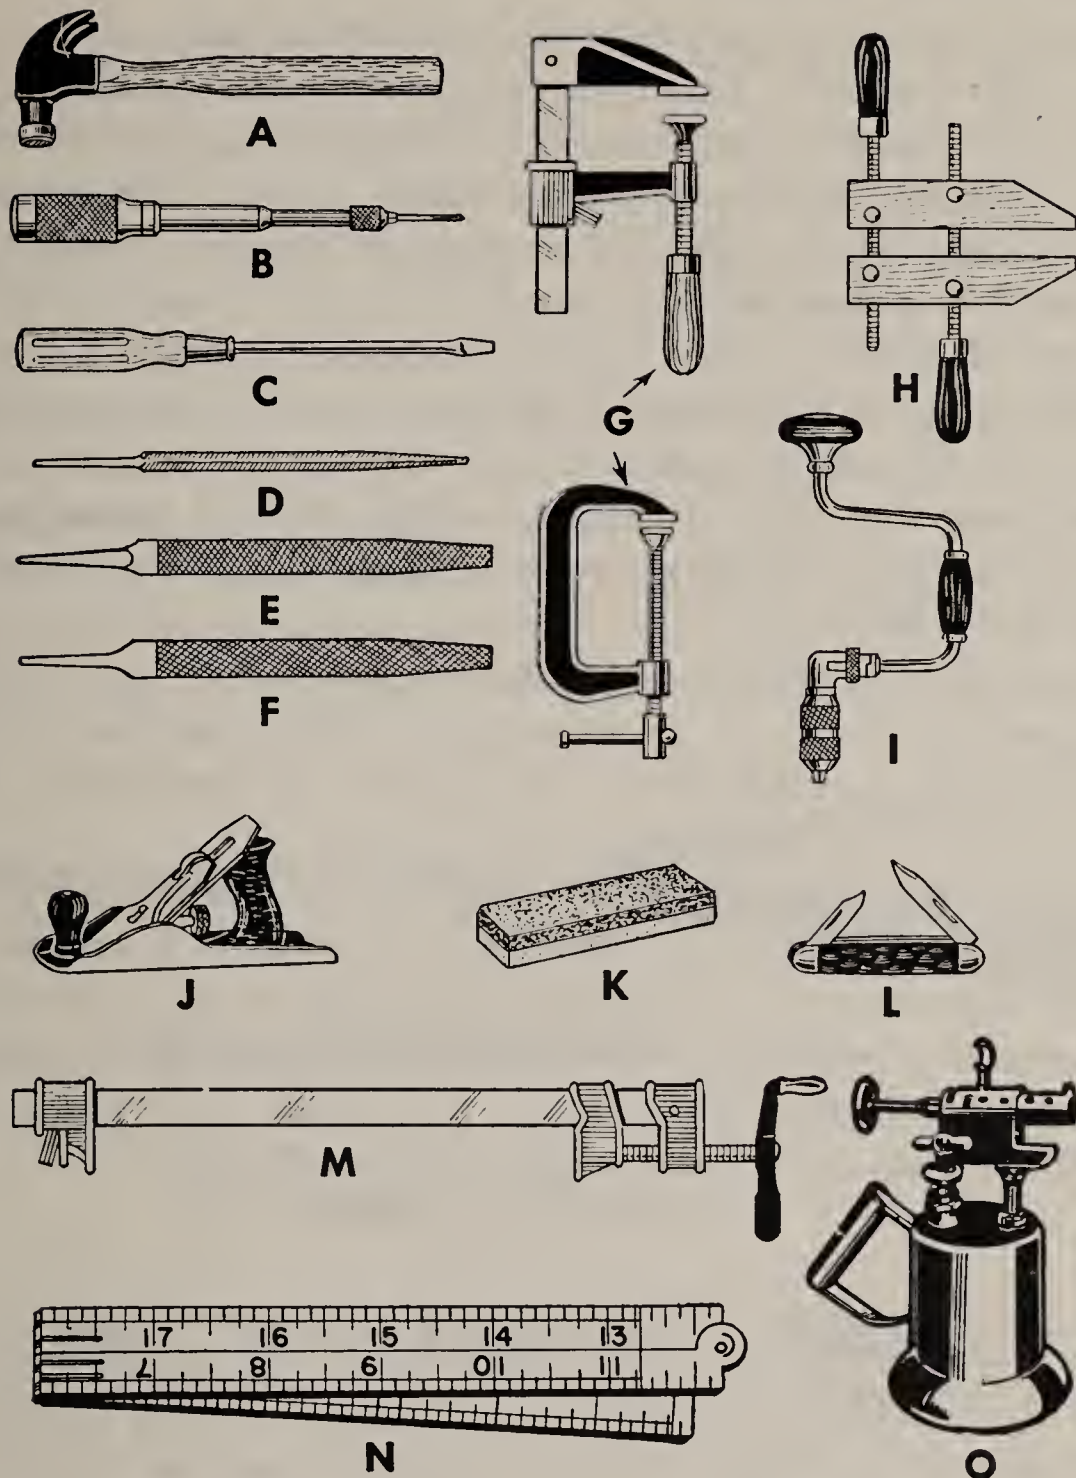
Hand tools continued. A, claw hammer; B, automatic push drill; C, screwdriver; D, slim-taper file; E, bastard file; F, rasp; G, clamps; H, hand screw; I, bit brace; J, jack plane; K, combination oilstone; L, pocketknife; M, long bar clamp; N, boxwood rule; O, blowtorch.
